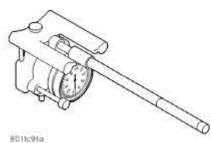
Bore Size Indicator C-119 Courtesy of CHRYSLER LLC
